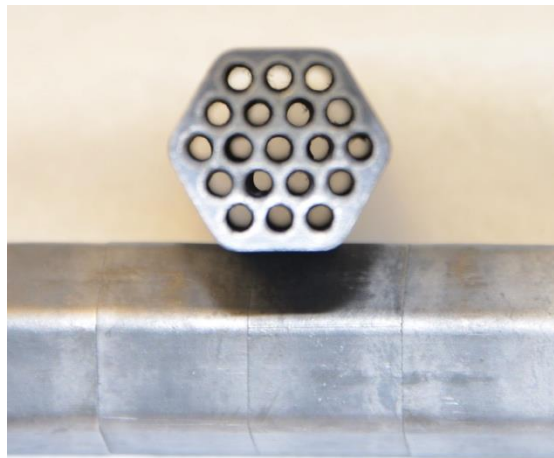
Example of the intricate net-shape processing that is feasible using SPS for the manufacture of metallic fuels [16].
